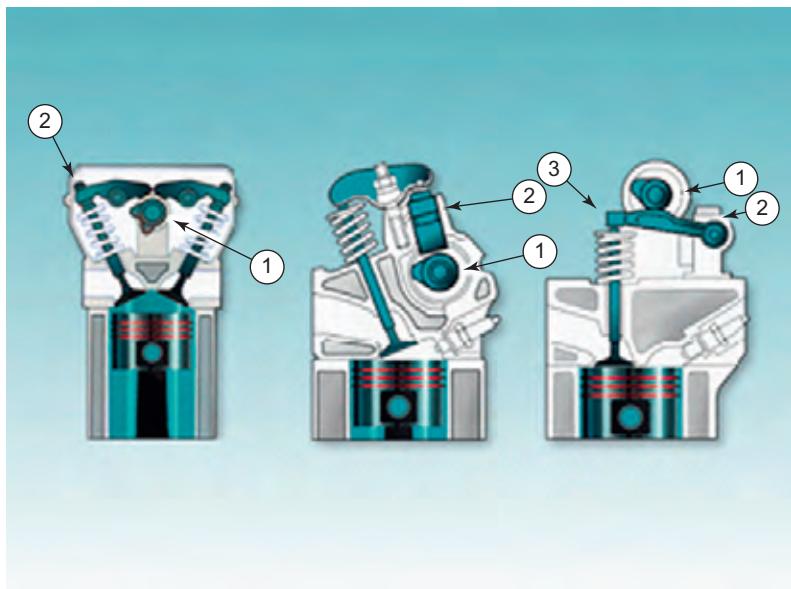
Valve operating mechanisms. Left: 1 – Cam; 2 – adjusting screw in direct acting rocker. Centre: 1 – Cam; 2 – hydraulic follower. Right: 1 – Cam; 2 – pivot and adjuster; 3 – roller follower
